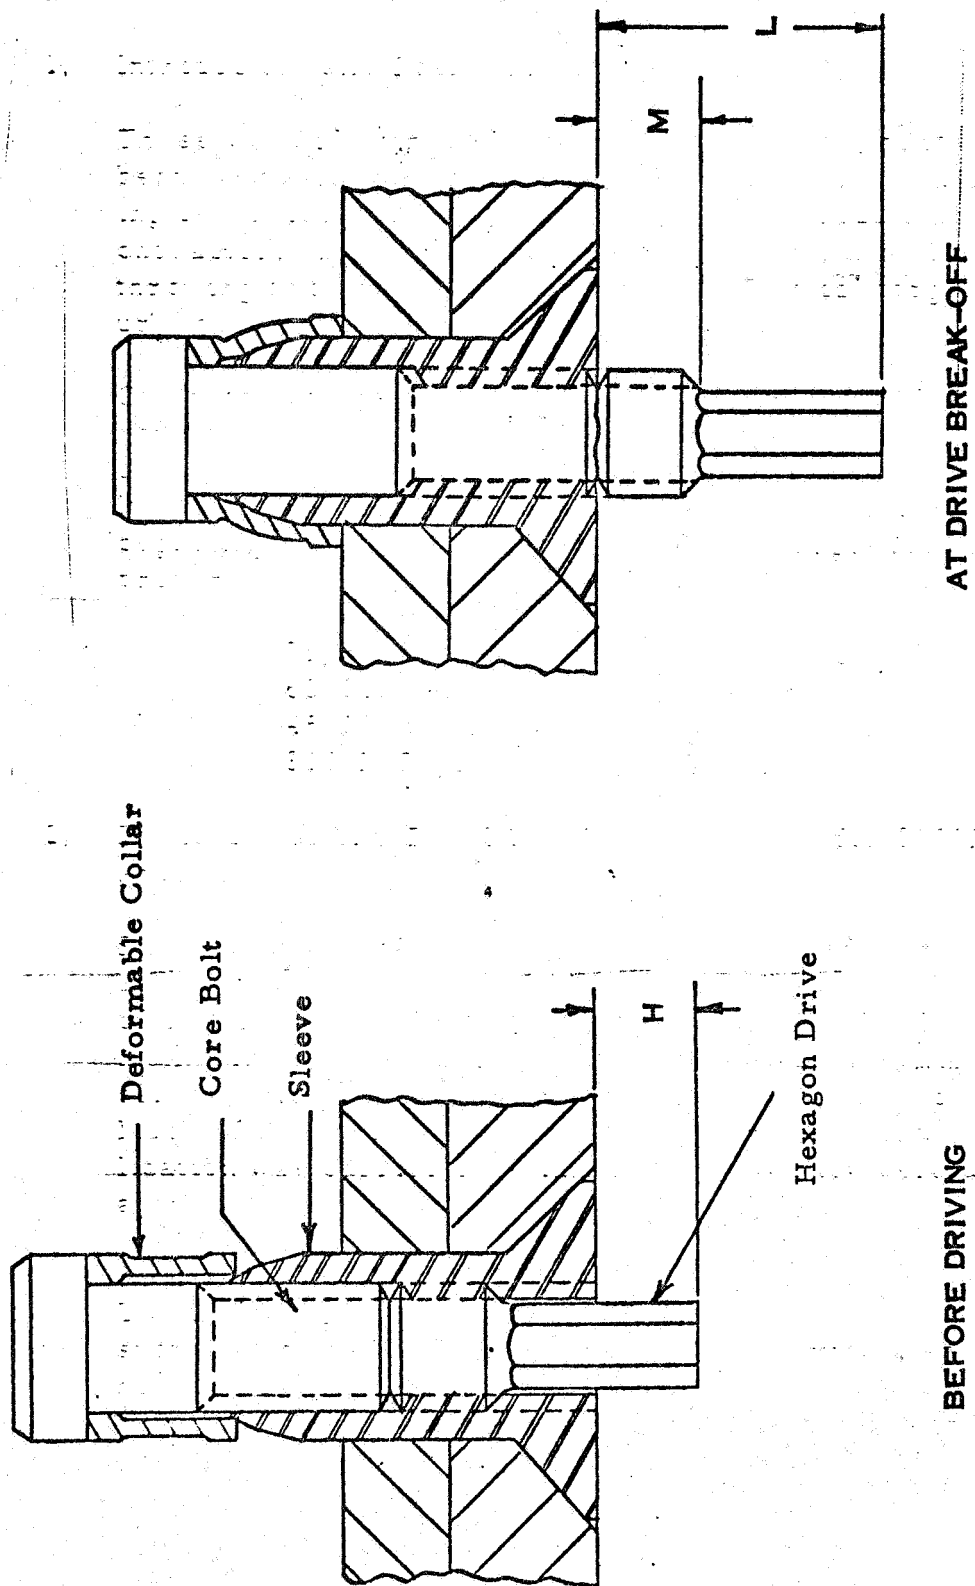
Schematic Sketch of Blind Fastener System Requiring Break-Off for Installation
